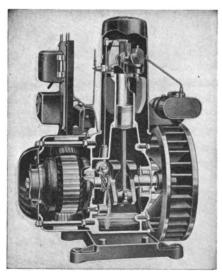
A sectional view of engine and generator of the plant shown in Fig. 281.
